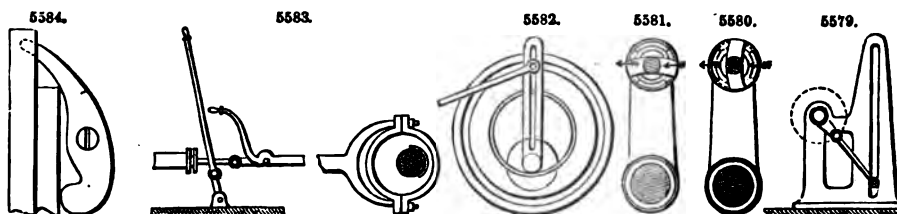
Reversing gear for a single engine. On raising the eccentric-rod the valve-spindle is released. The engine can then be reversed by working the upright lever, after which the eccentric-rod is let down again. The eccentric in this case is loose upon the shaft, and driven by a projection on the shaft acting upon a nearly semicircular projection on the side of the eccentric, which permits the eccentric to turn half-way round on the shaft on reversing the valves.
